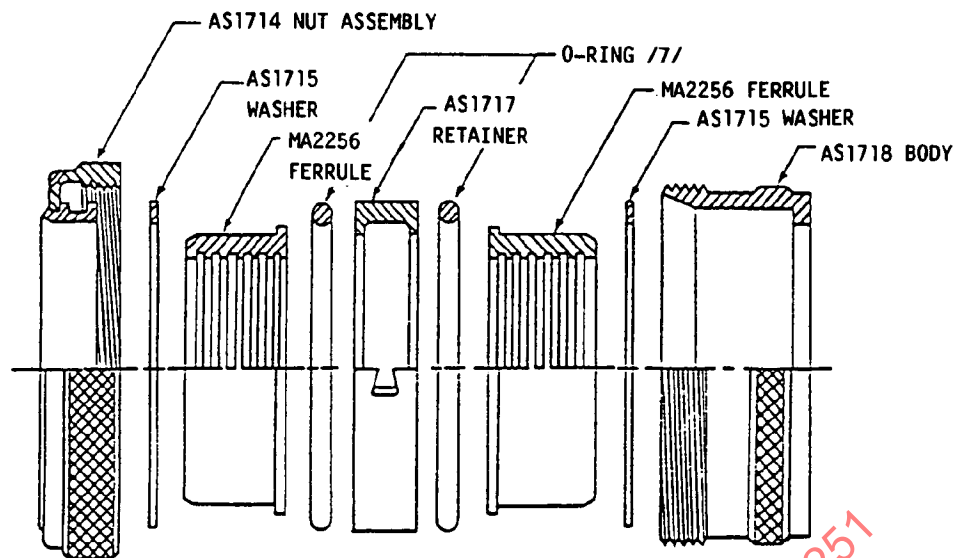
EXPLODED VIEW FULL COUPLING /10/
